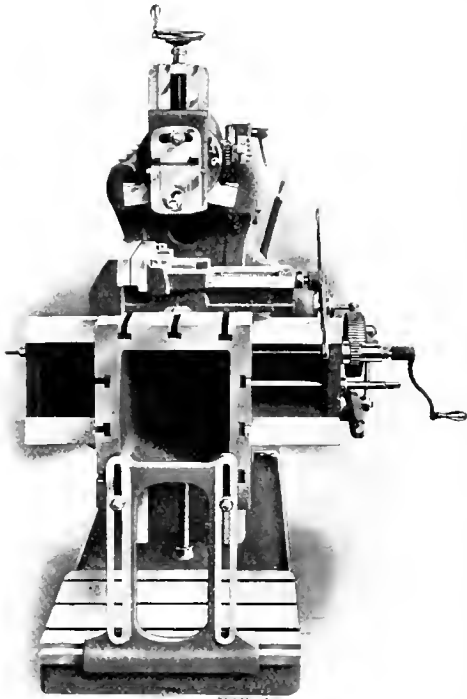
Front View of Walcott & Wood 20-inch Crank Shaper.
